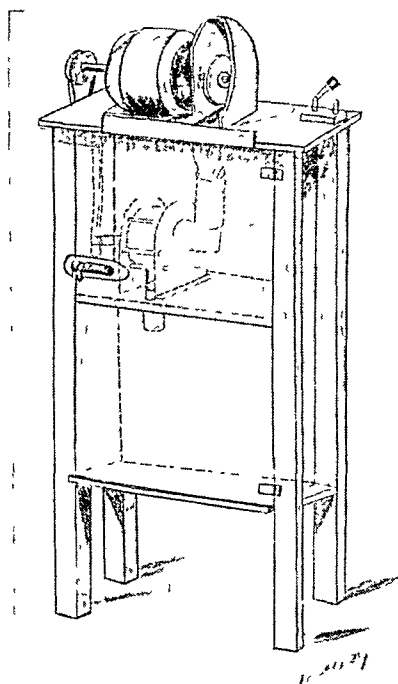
Motor-driven emery wheel used to smooth and skive the rubber supports
